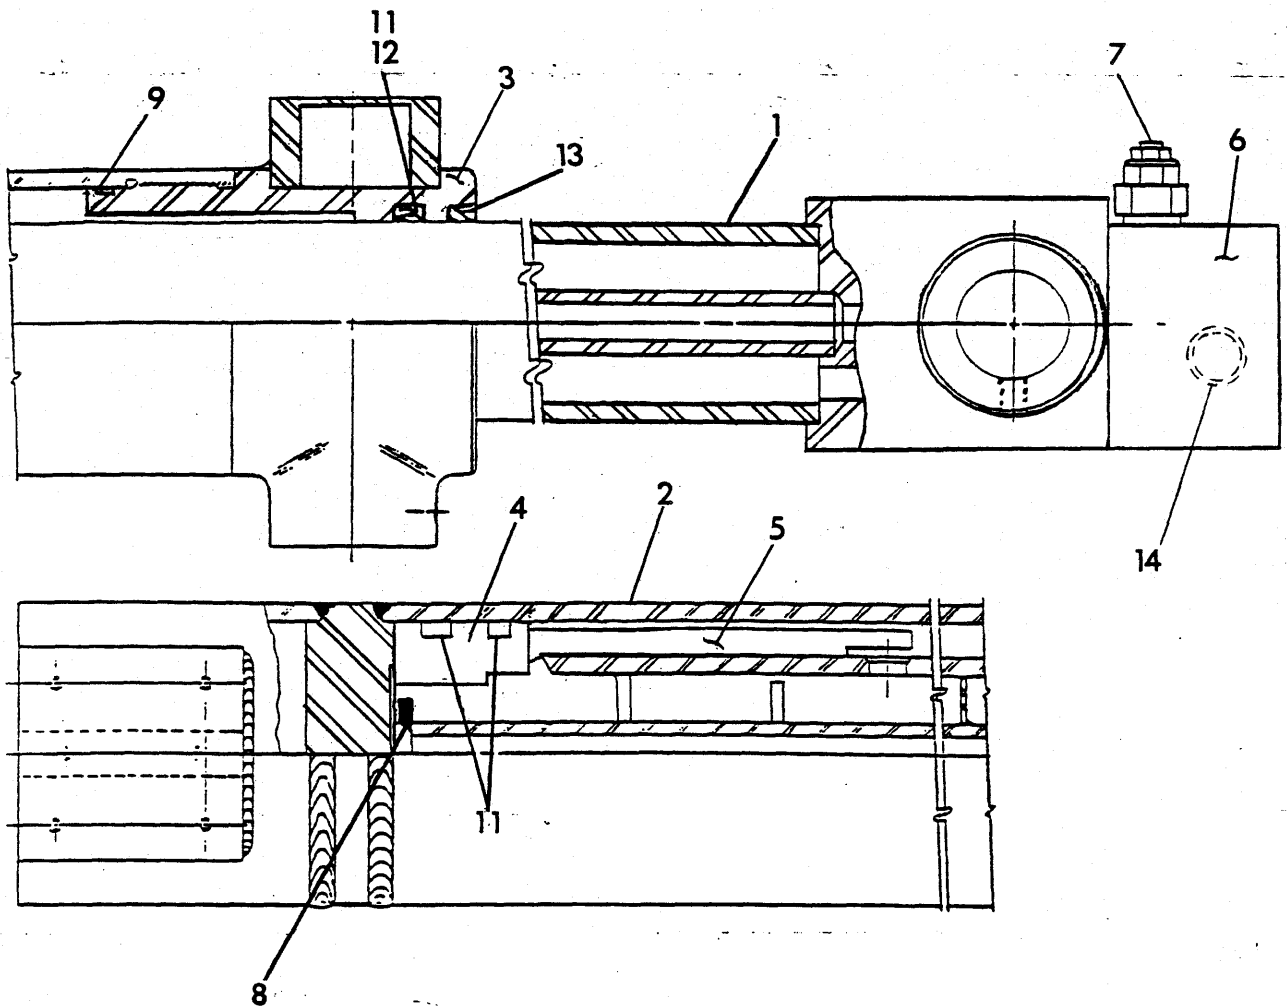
BOOM EXTENSION CYLINDER ASSEMBLY (48)
